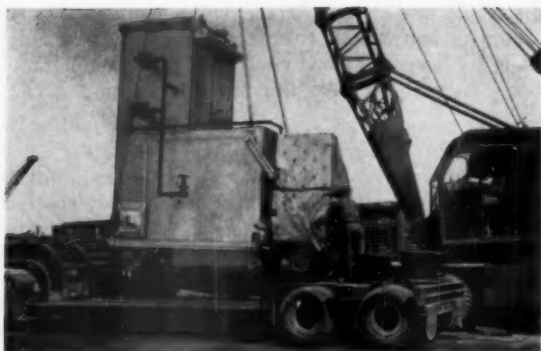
Completely assembled boiler Figs. 5, 6 on trailer truck
